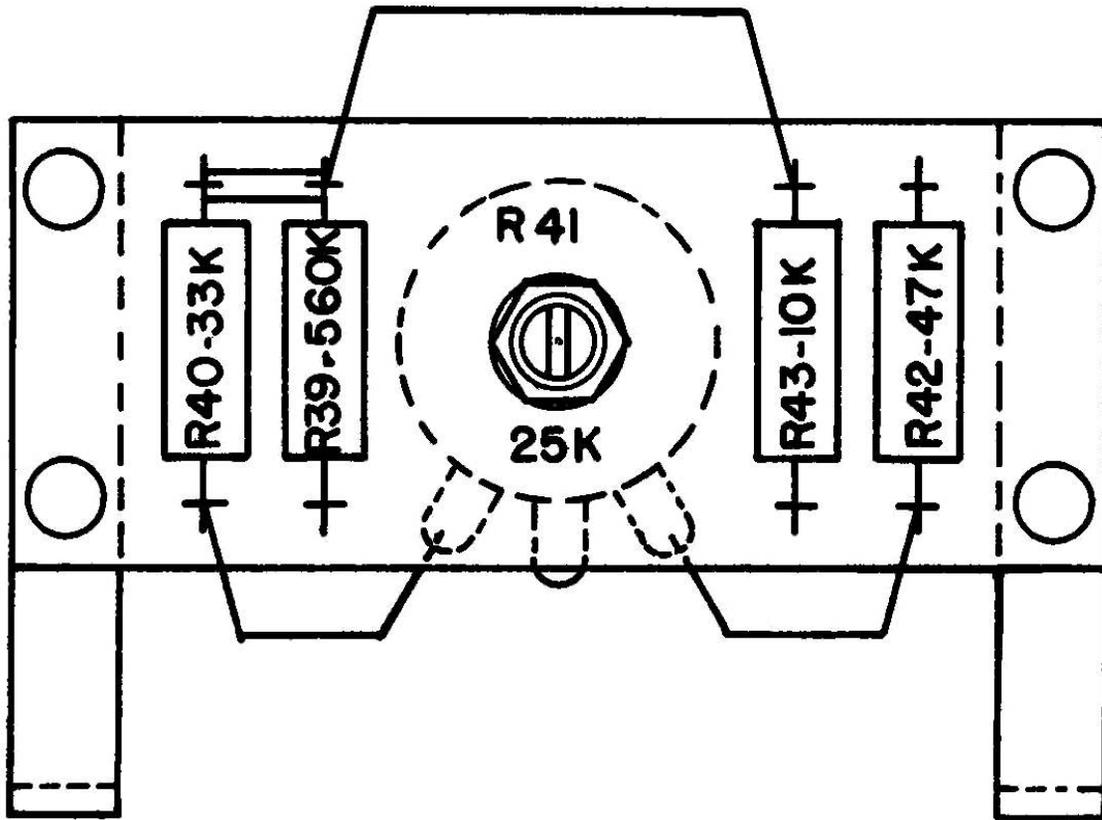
Model 200I Bottom View Bottom Plate Removed
